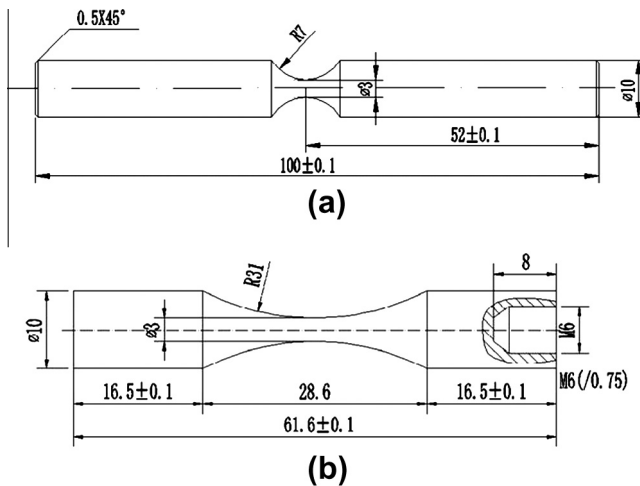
Shapes and dimensions (in mm) of two types of specimens for fatigue tests, (a) for rotating bending test, the part of 52 mm for loading, and (b) for ultrasonic axial cycling test.
